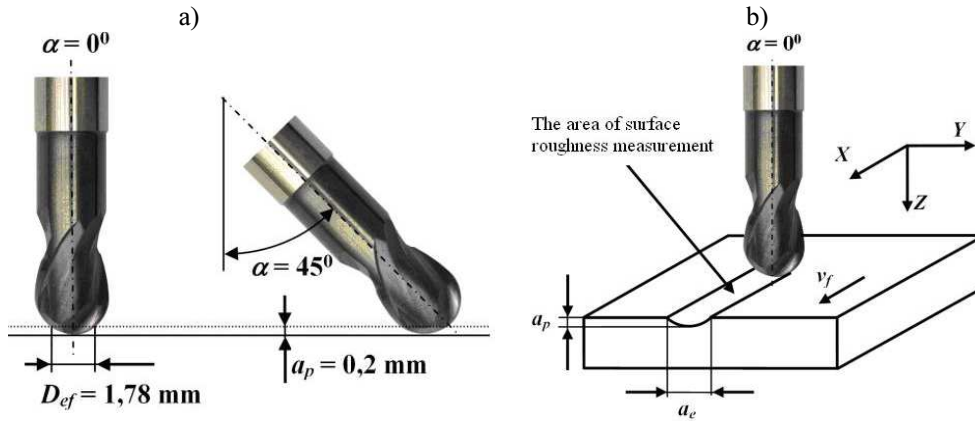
The description of the ball end milling process: a) geometric parameters; b) the area of surface roughness measurement method.
